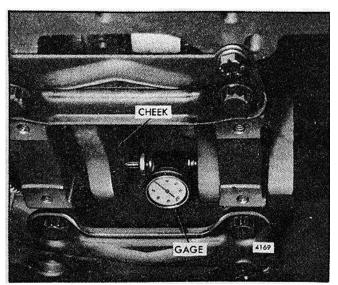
Crankshaft Distortion Measuring Gage Mounted on Crankshaft
